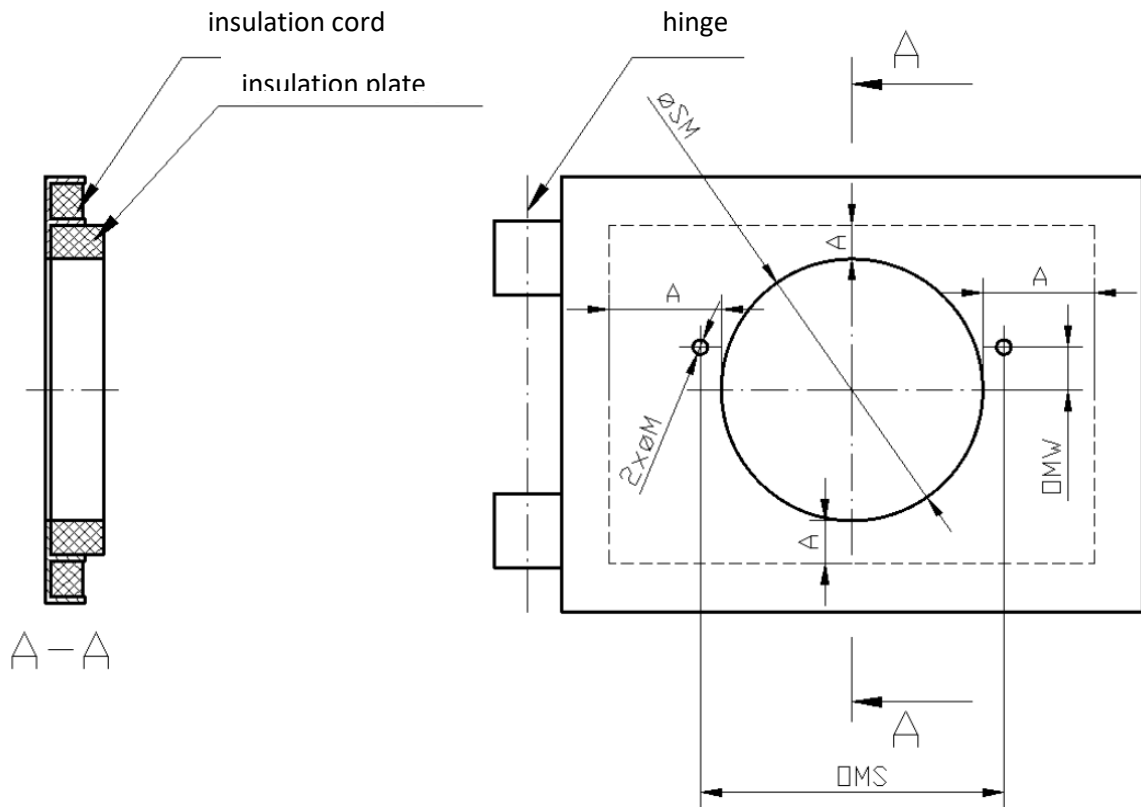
Diagram for the location of the mounting holes for burner types: 4-16 kW, 5-20 kW, 6-26 kW, 8-36 kW, 10-50 kW.
